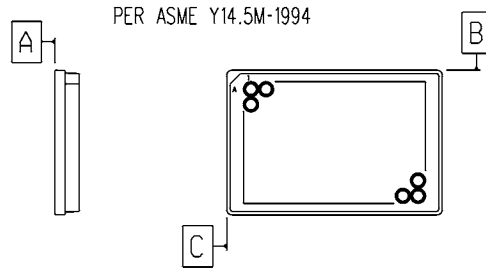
Mechanical drawings defining the flange dimensions of a microplate
